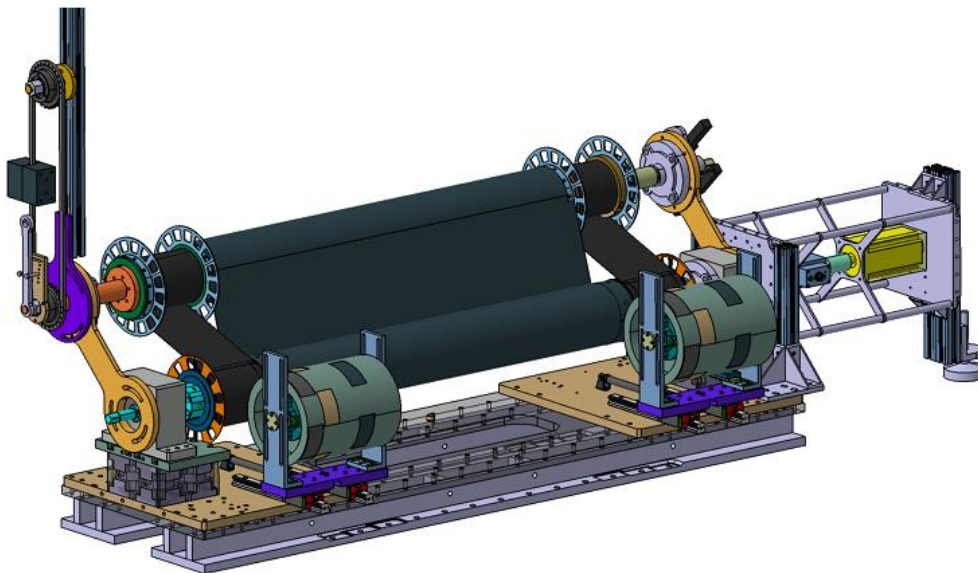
Three-dimensional (3-D) model of the BB integration/assembly setup
